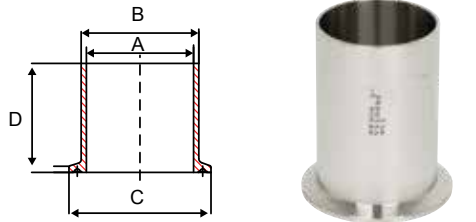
MPW6 - Heavy Tank Weld Ferrule
